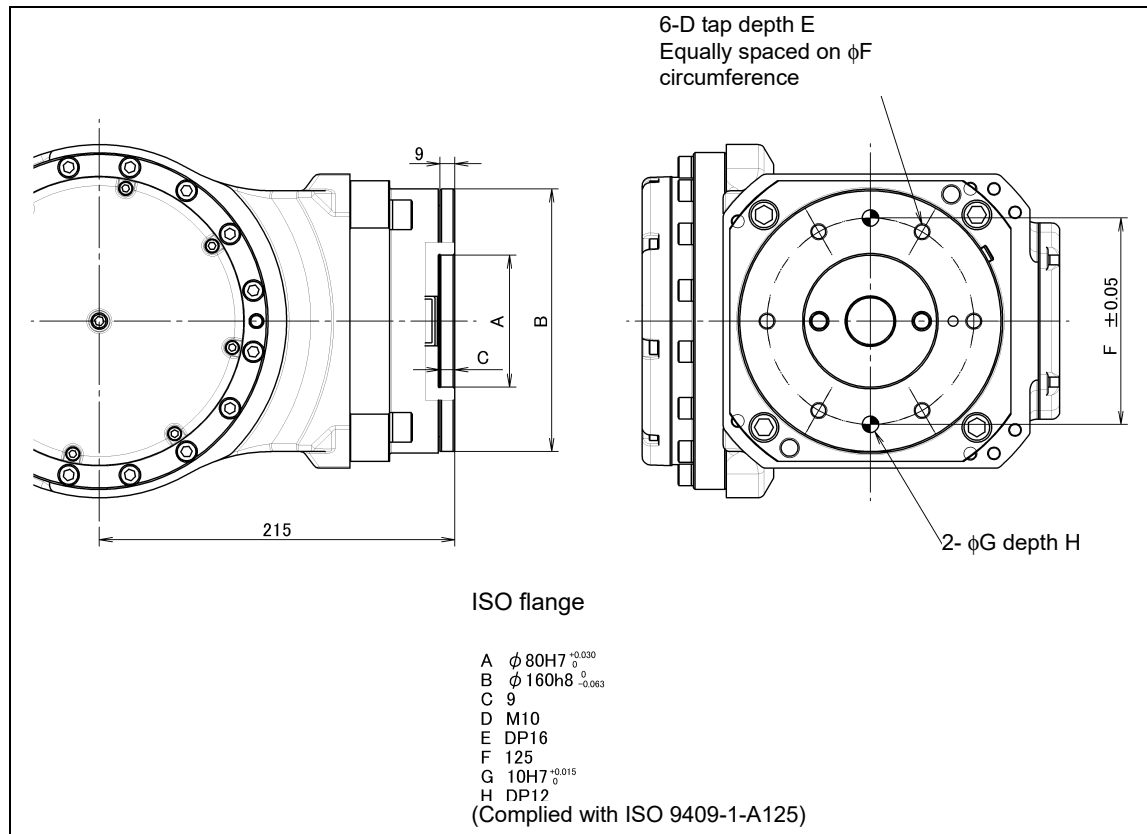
(b) End effector mounting face (ISO flange) (R-2000iB/165F/165R/170CF/125L/100H/150U)
